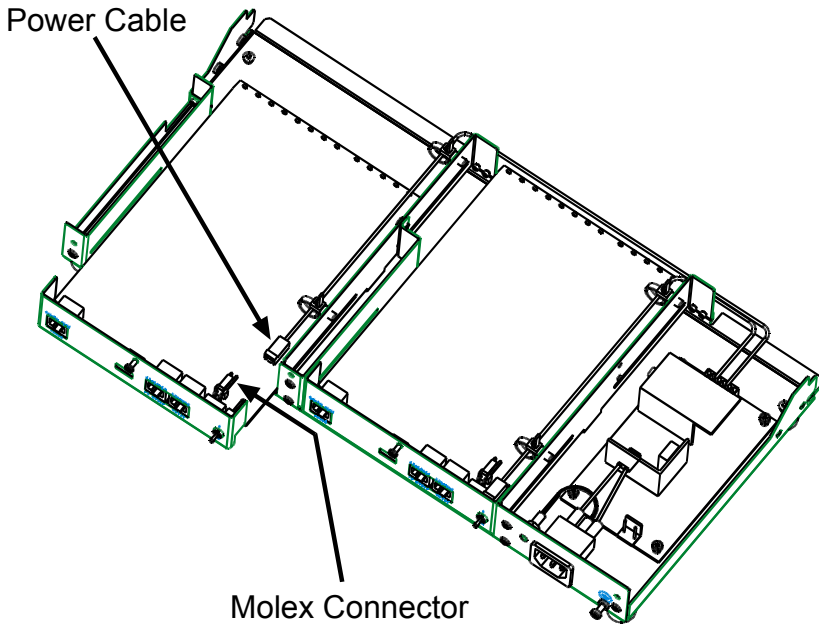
MVP2410/3010 Chassis (top/rear view)
